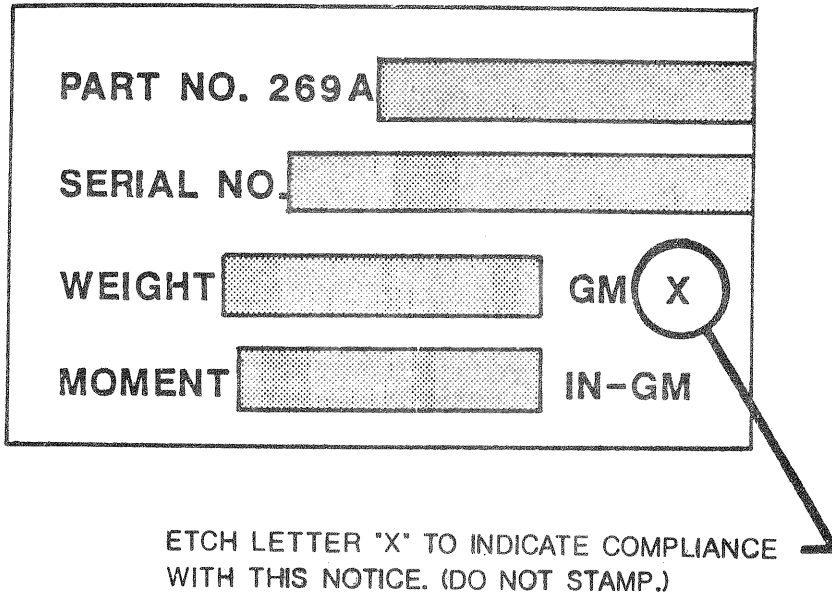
TAIL ROTOR BLADE IDENTIFICATION PLATE
